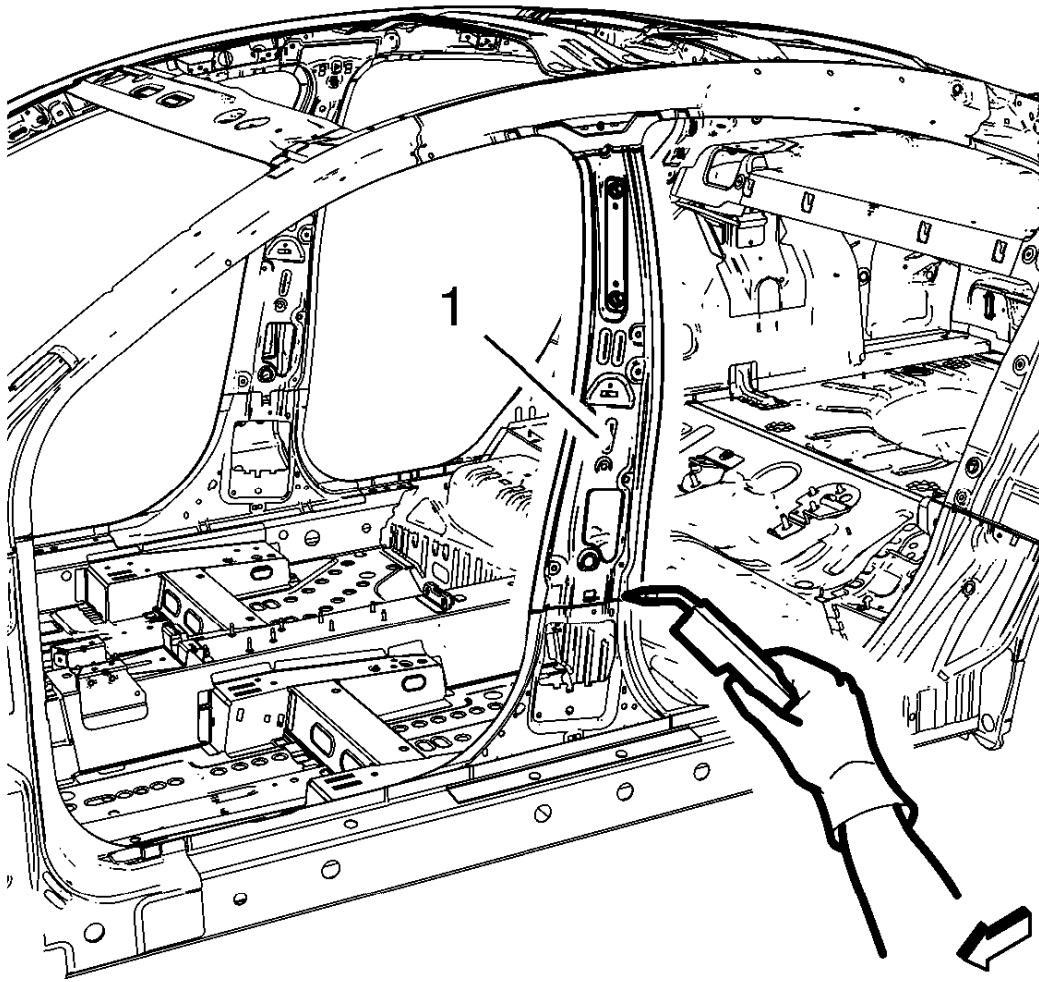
Welding Upper And Lower Center Pillar Inner Panel
